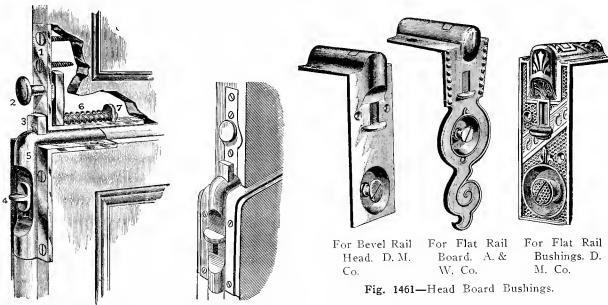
Head Board Bolt and Application Details. Dayton Manufacturing Company.
